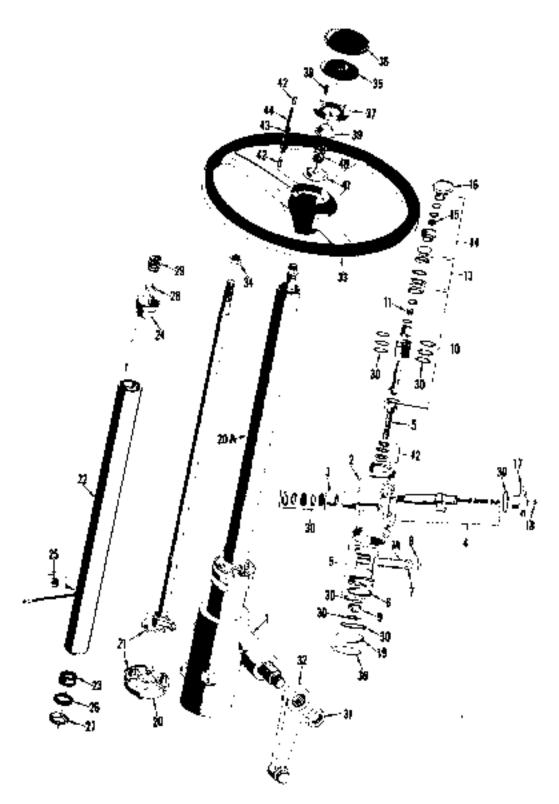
STEERING GEAR, MASO LESS POWER STEERING
